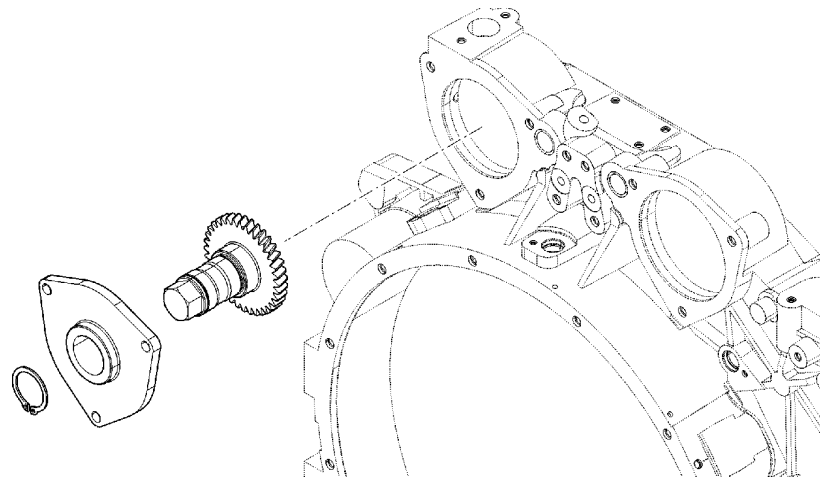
Turning gear - Mounting the power take-off NA2 special tool no. 30e
